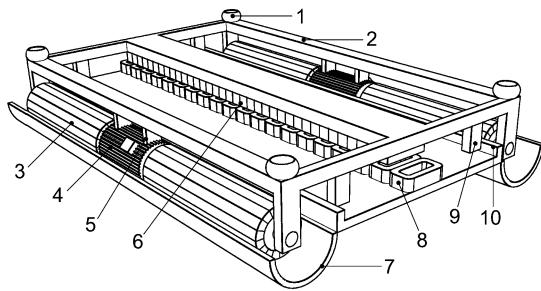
Configuration of the cylindrical EDS device. 1: air spring, 2: chassis assembly, 3: PM Halbach rotor, 4: rotating motor with double extensions, 5: fixed module for motor, 6: propulsion magnets, 7: semicircular track, 8: LSM windings, 9: supporting block for location, and 10: limit baffle plate.
